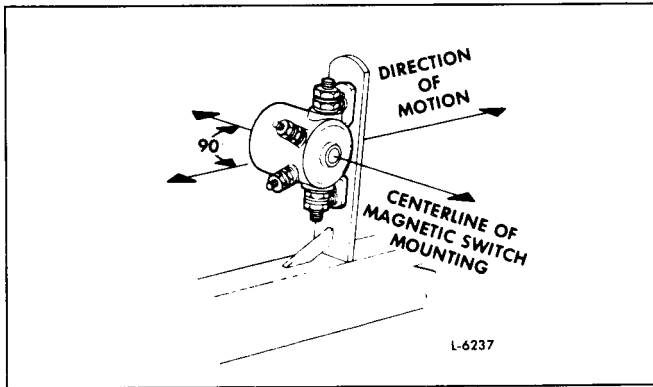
Starter Auxiliary Magnetic Switch Mounting
